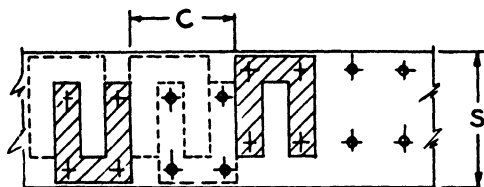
A highly economical scrap-strip design for U-shaped blanks.
